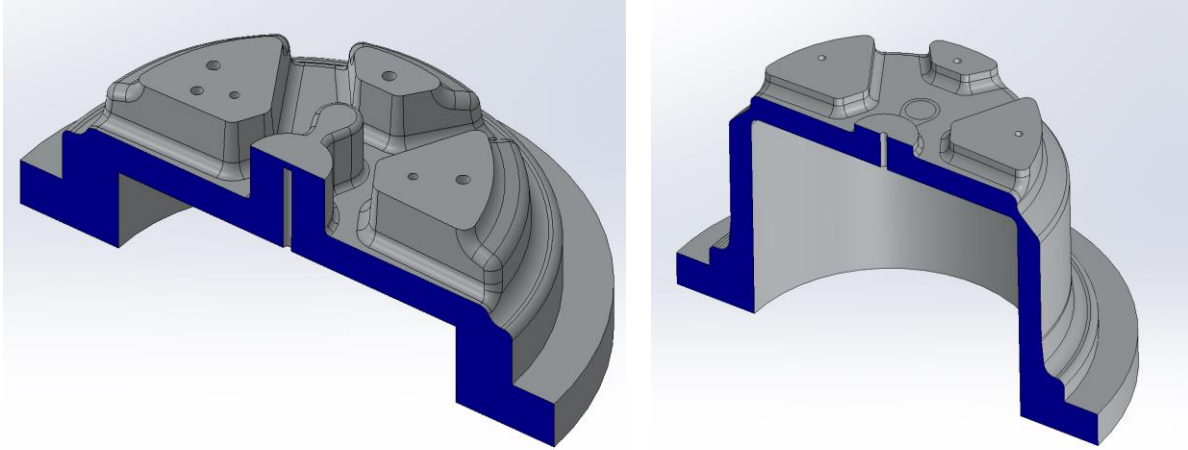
Section view of completed tool design. Outboard section (Left) and inboard section (Right)
